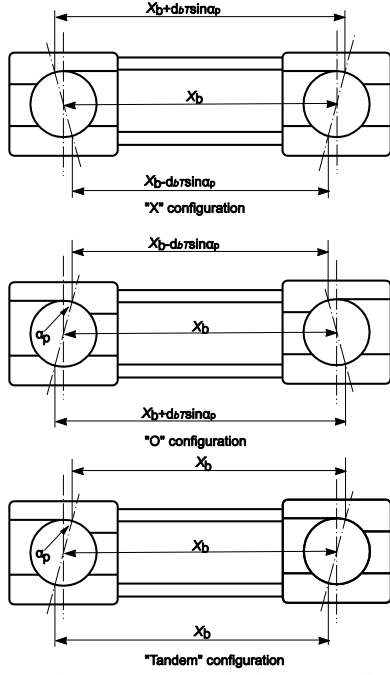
Thermal expansion for lock-ring preload bearing configuration
